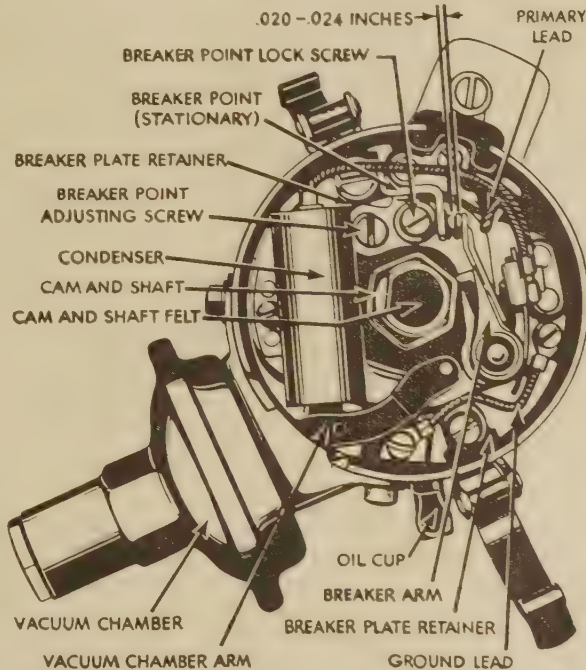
The Autolite Contact-breaker Unit (Distributor Cap and Rotor Arm removed).
